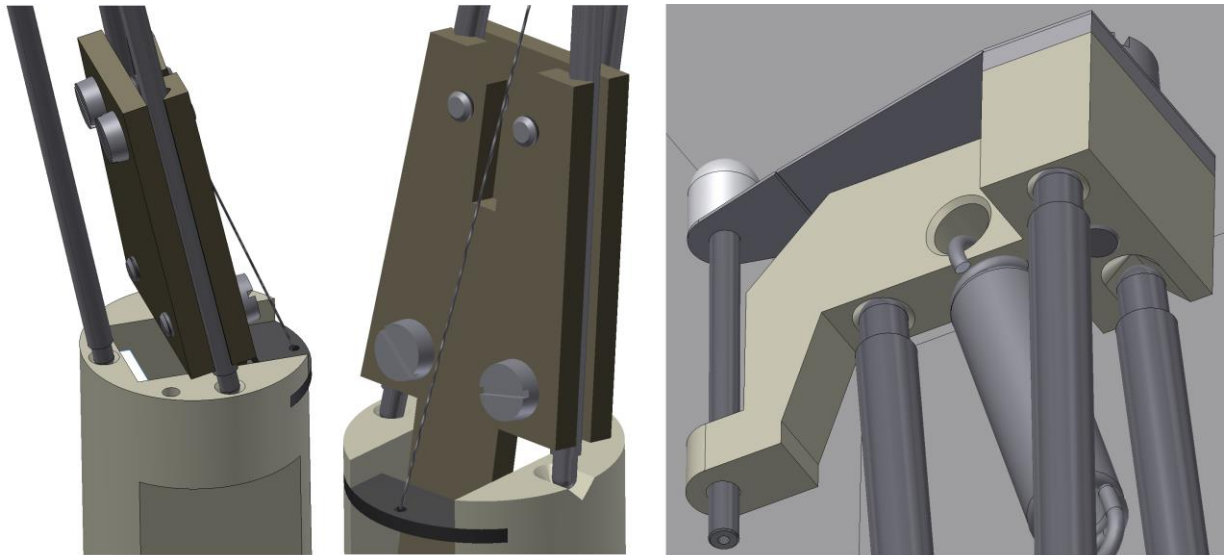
Detailed view to the joints. Spherical ball joints and combined joints in v-grooves are used to sufficiently constrain the mechanism.
